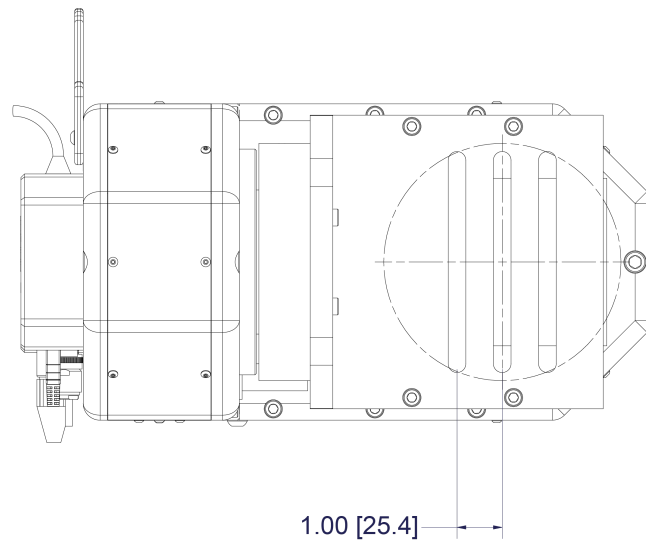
X650 Pan & Tilt Head (bottom view, camera cradle not shown)
